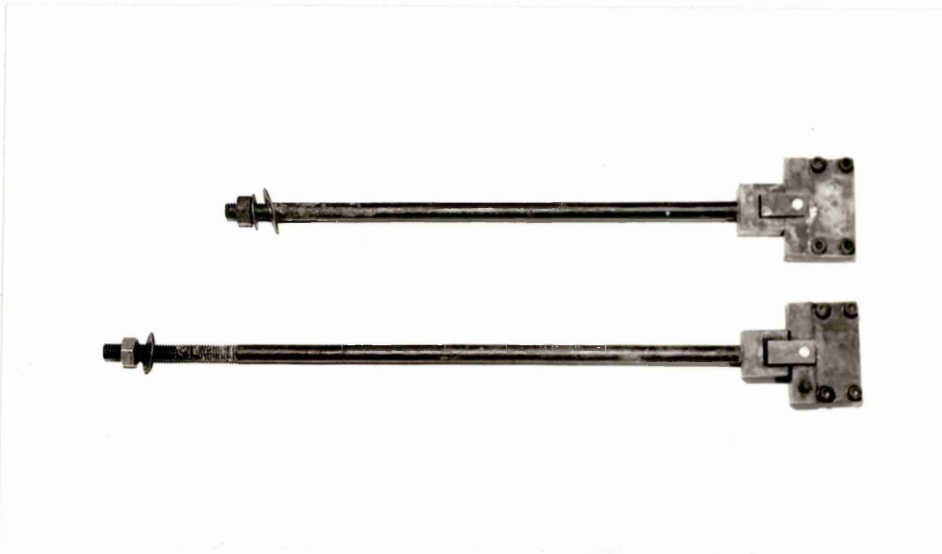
Specimen grips for use on the Etec Creep machine.
